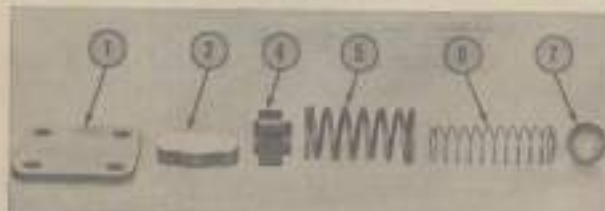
Removed oil pressure relief valve and camshaft thrust assembly. See Fig. 52 for legend.
